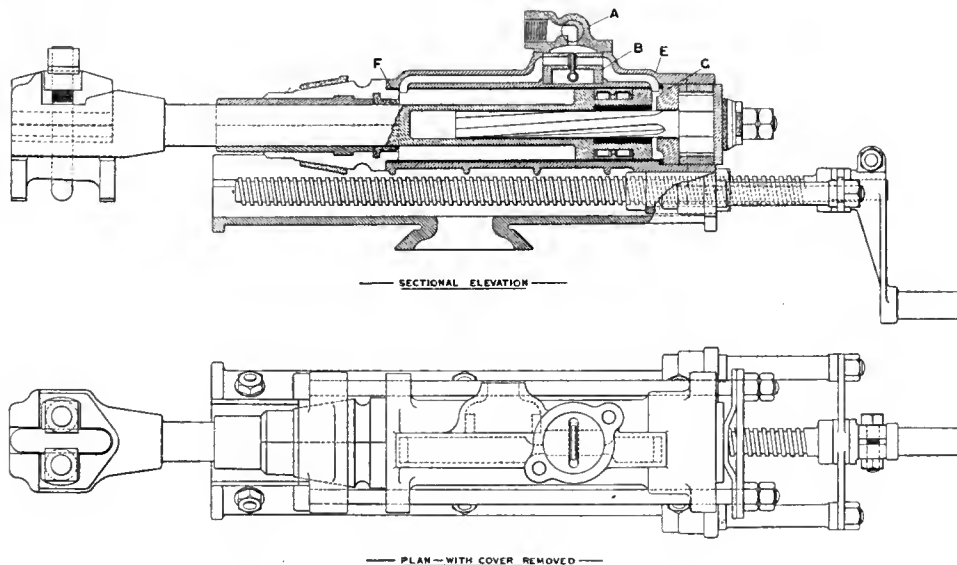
THE HOLMAN 2½-IN. STOPPING AIR-VALVE DRILL
